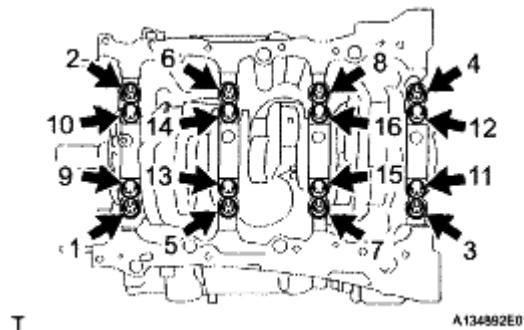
Identifying Bearing Cap Bolts Loosening Sequence
